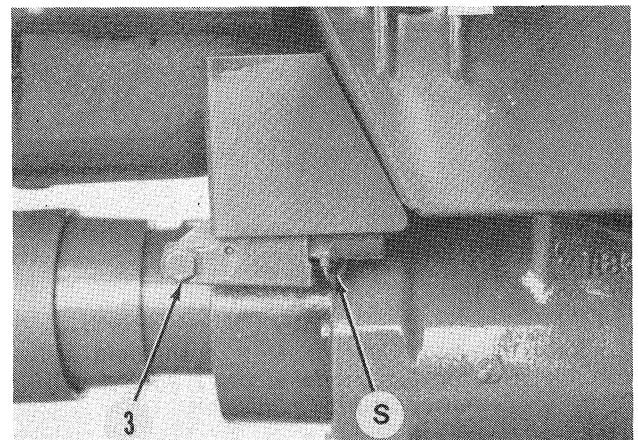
Install a 300 psi (2000 kPa) gage at MFWD clutch test port (3) to check clutch hydraulic pressure. Refer to text.
